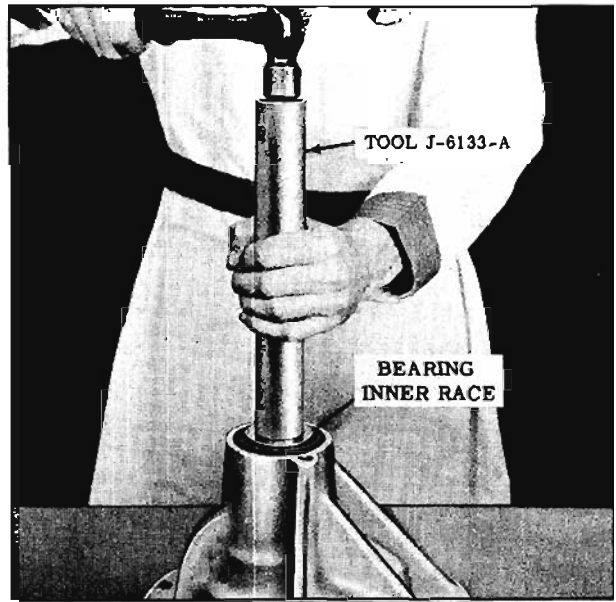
Installing Front Pinion Bearing Inner Race
